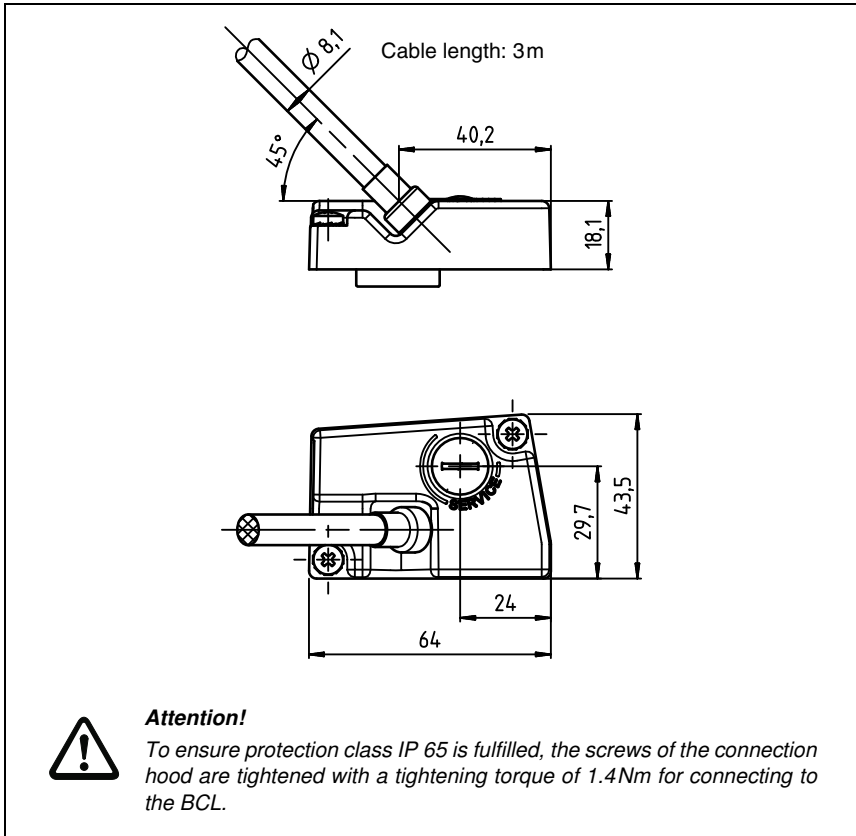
Dimensioned drawing of KB 301-3000 cable hood
